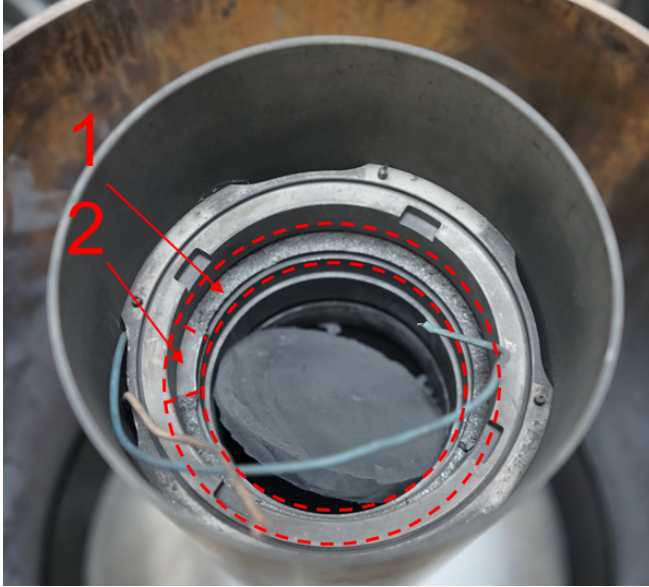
Top view into the rocket motor after the nozzle block failure. Section 1 marks the stamped out section and section 2 marks the remaining original section.
